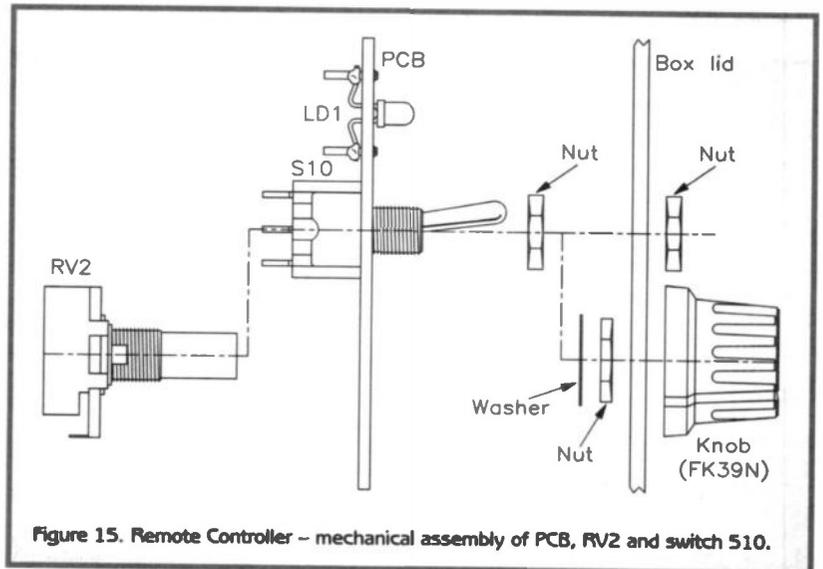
Remote Controller - mechanical assembly of PCB, RV2 and switch S10.
